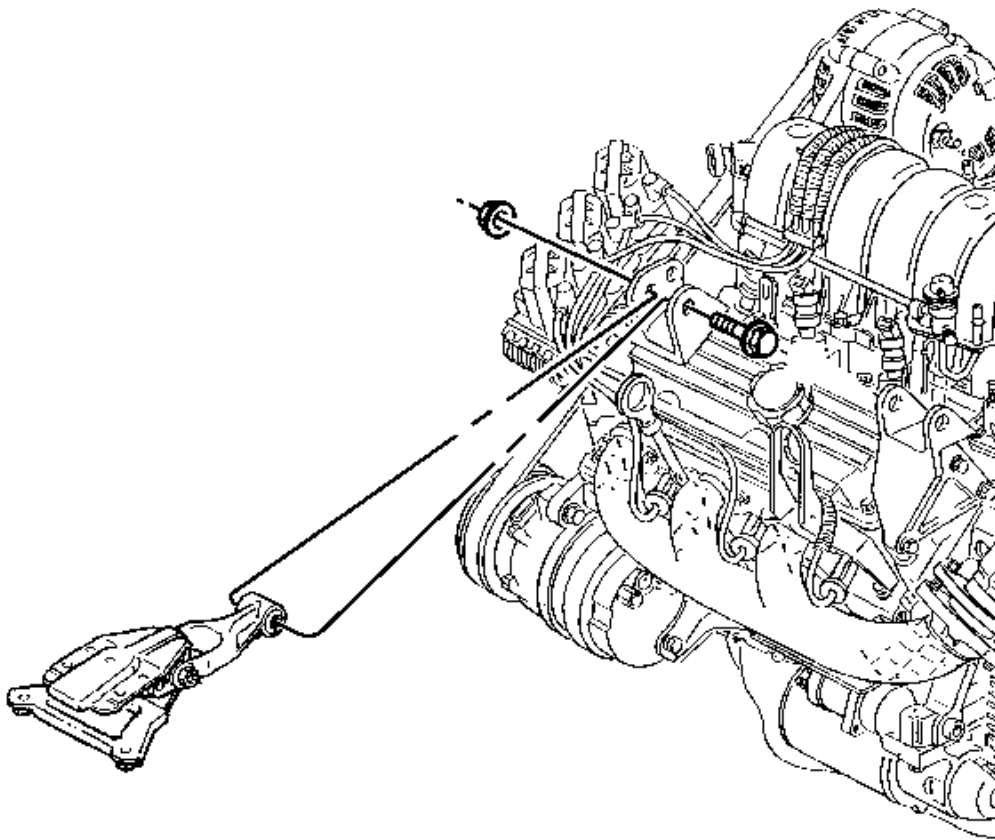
Removing Right Engine Mount Strut From Upper Engine Mount Strut Bracket
